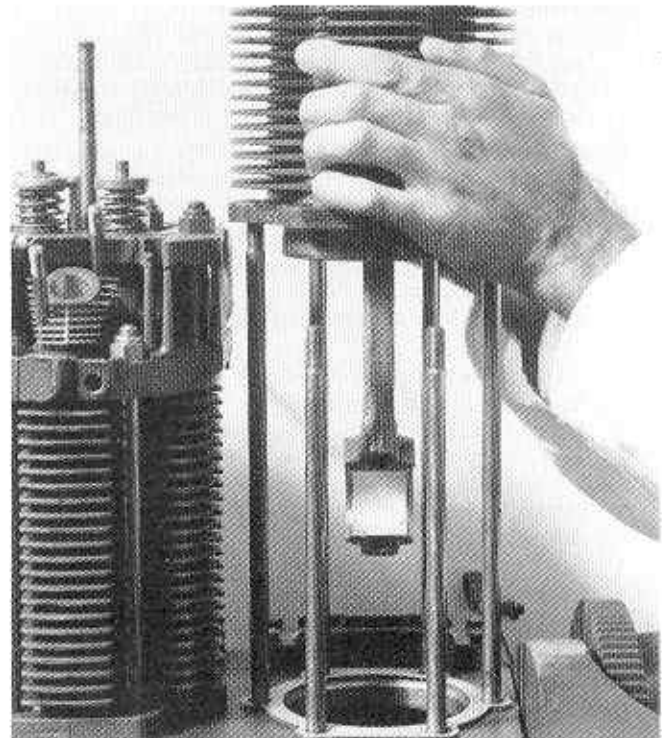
Cylinder, Piston and Connecting Rod Removal
